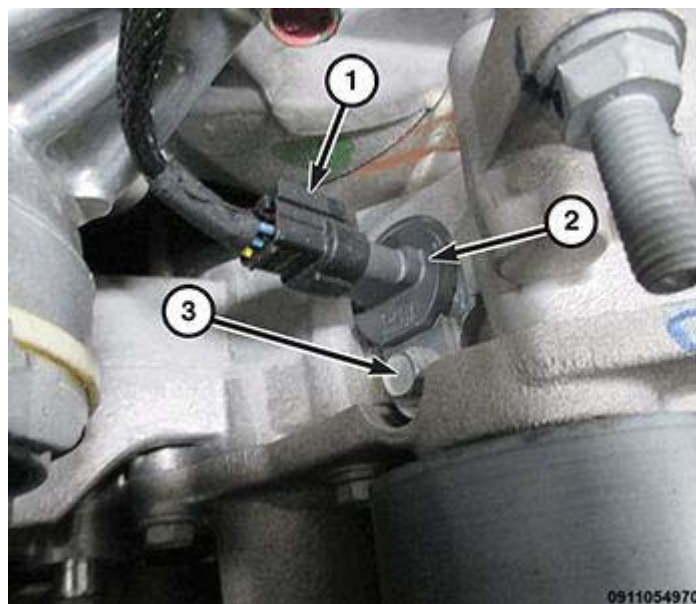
Camshaft Position Sensor (CMP), Connector & Bolt
